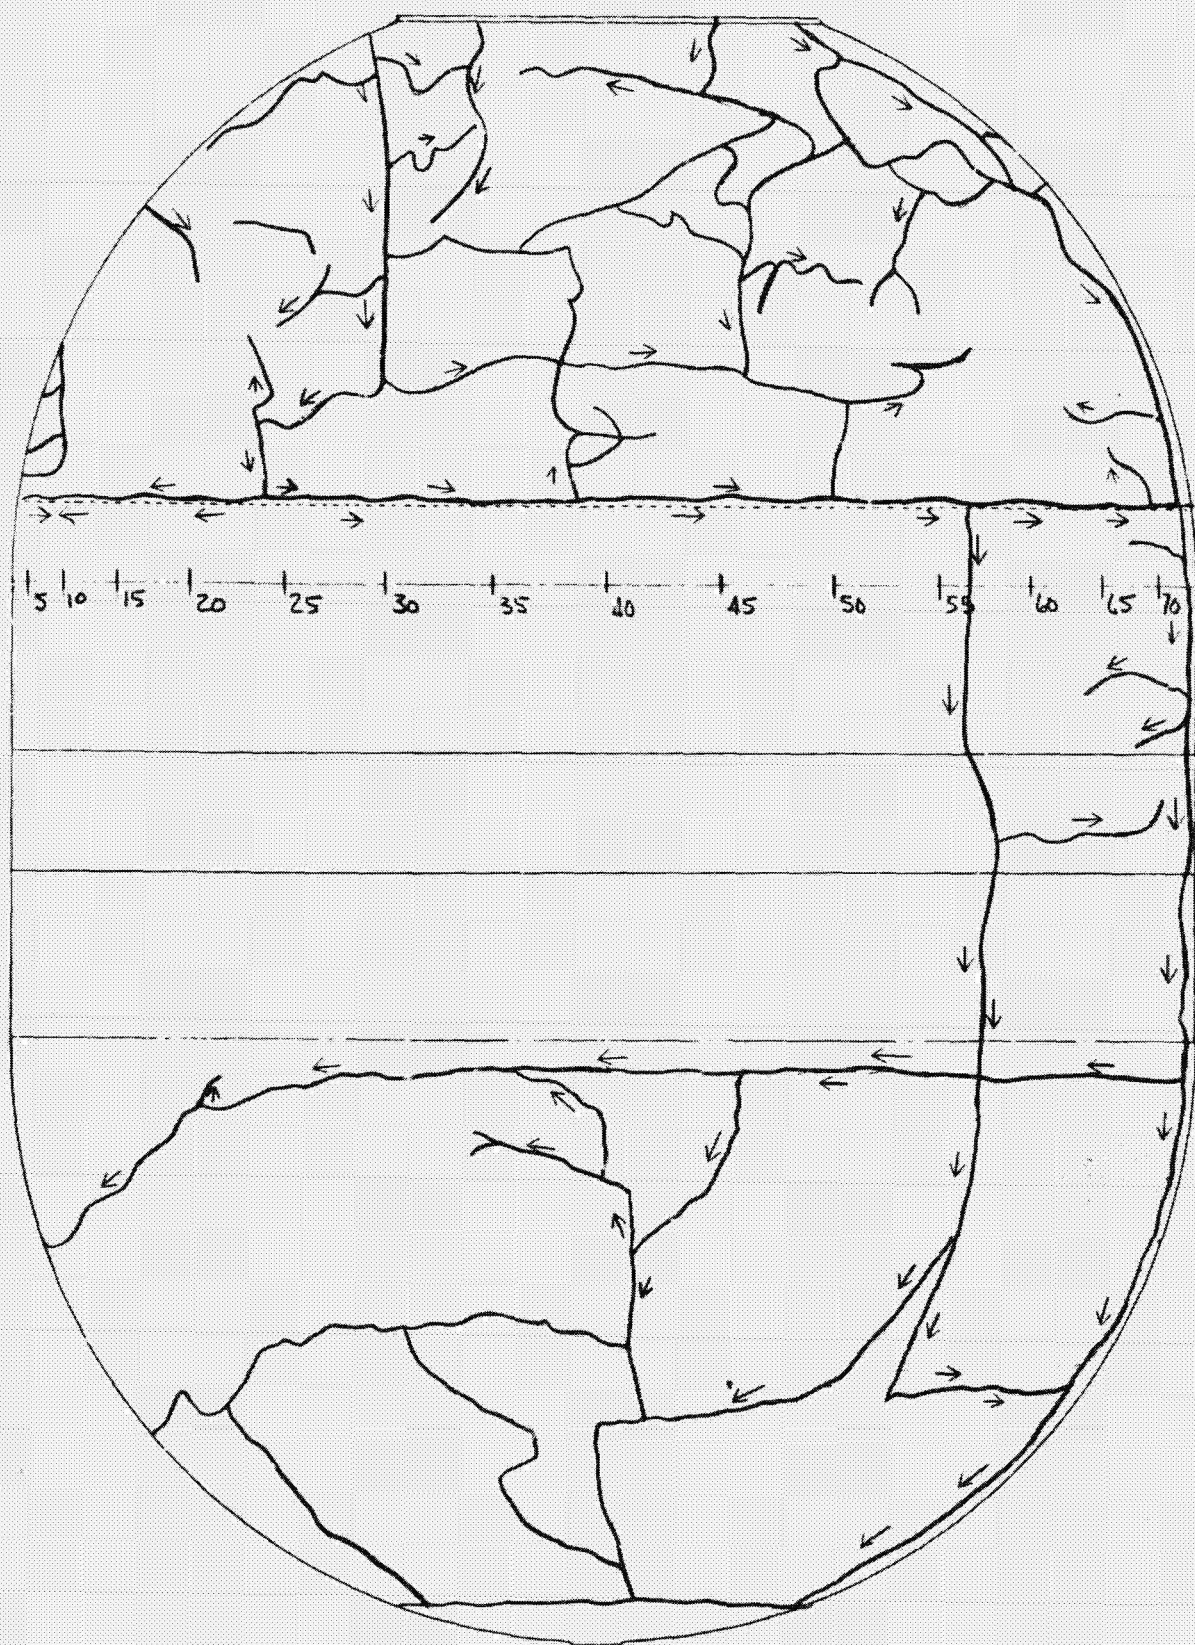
Reconstruction of DPS Propellant Tank Failure
